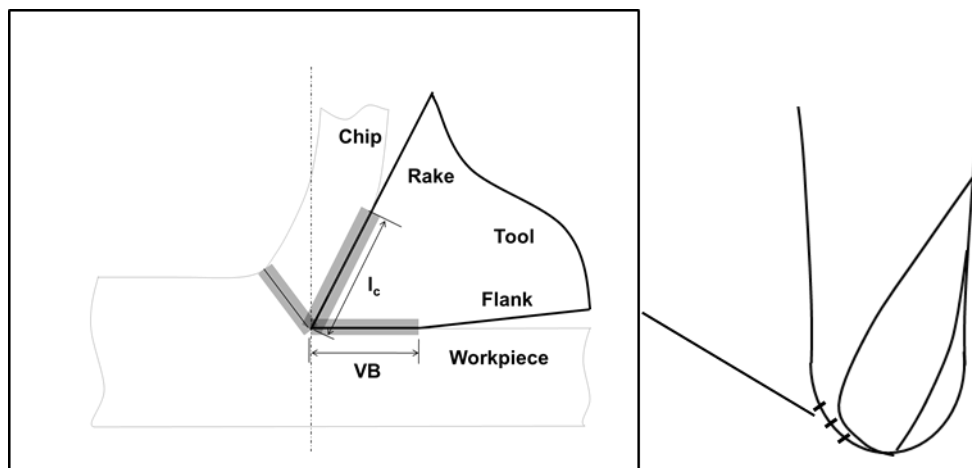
Elemental cutting edge on the flutes of ball-end mill
